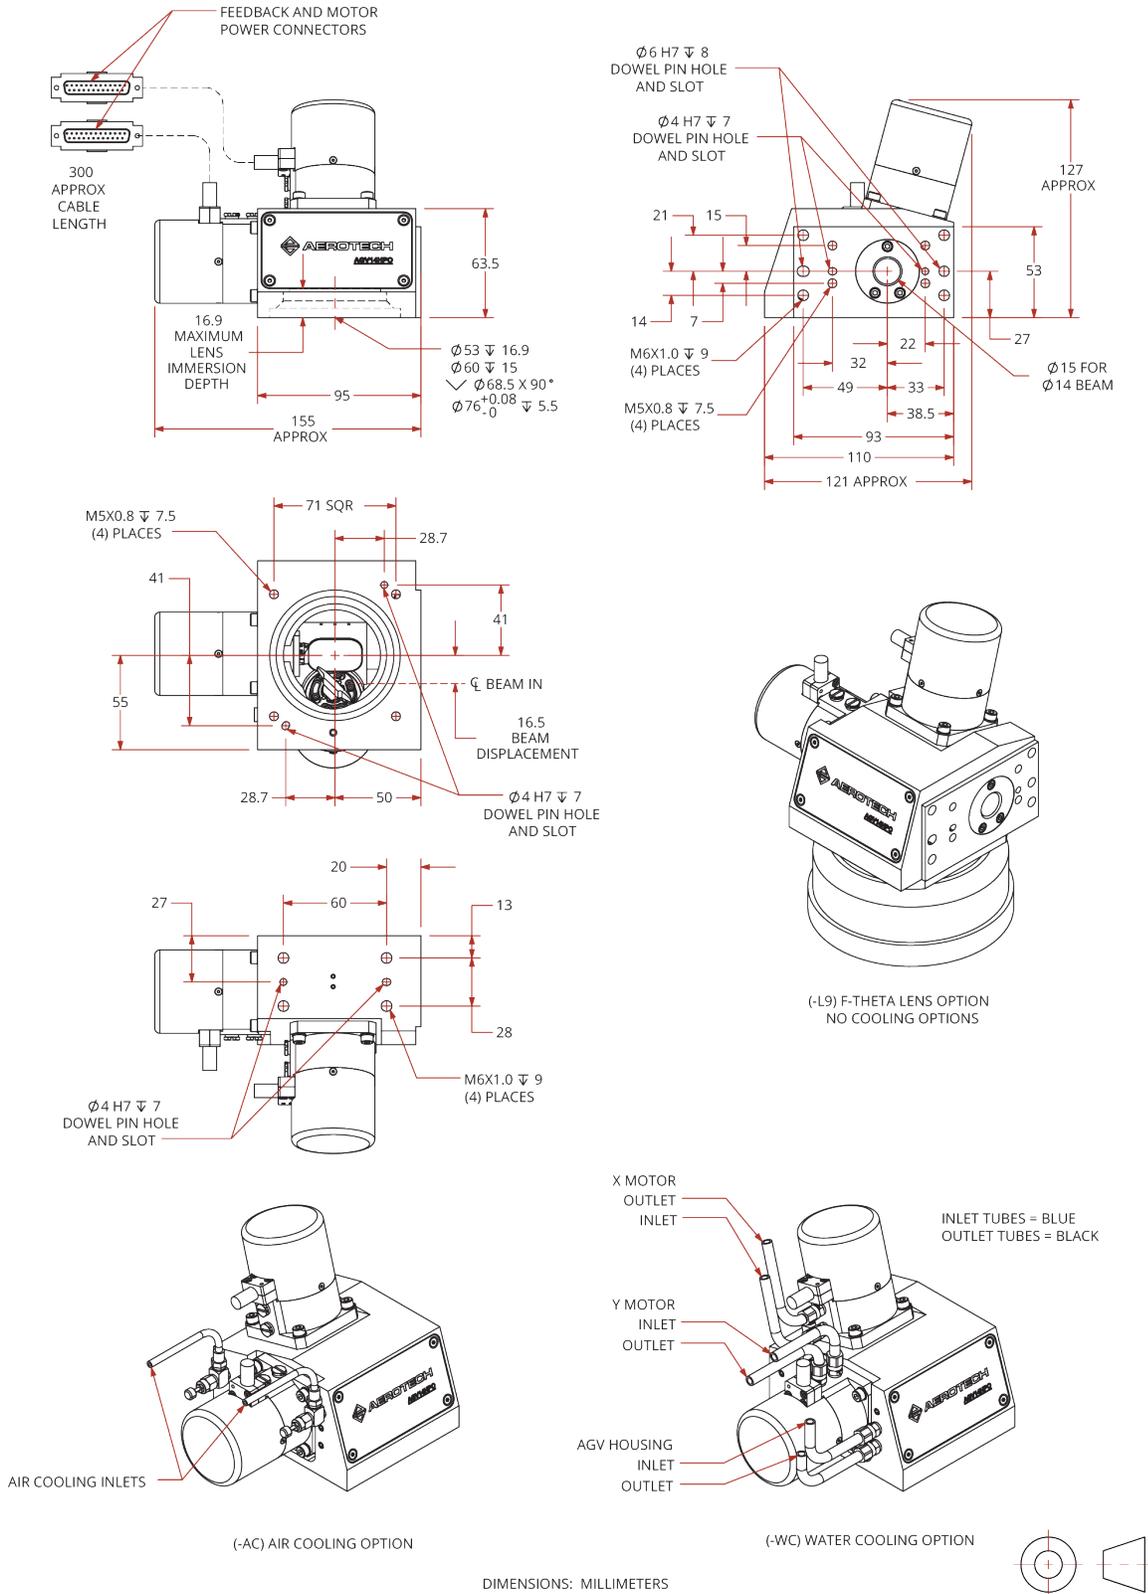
AGV14HPO-BE2 Galvanometer Scanner Dimensions
